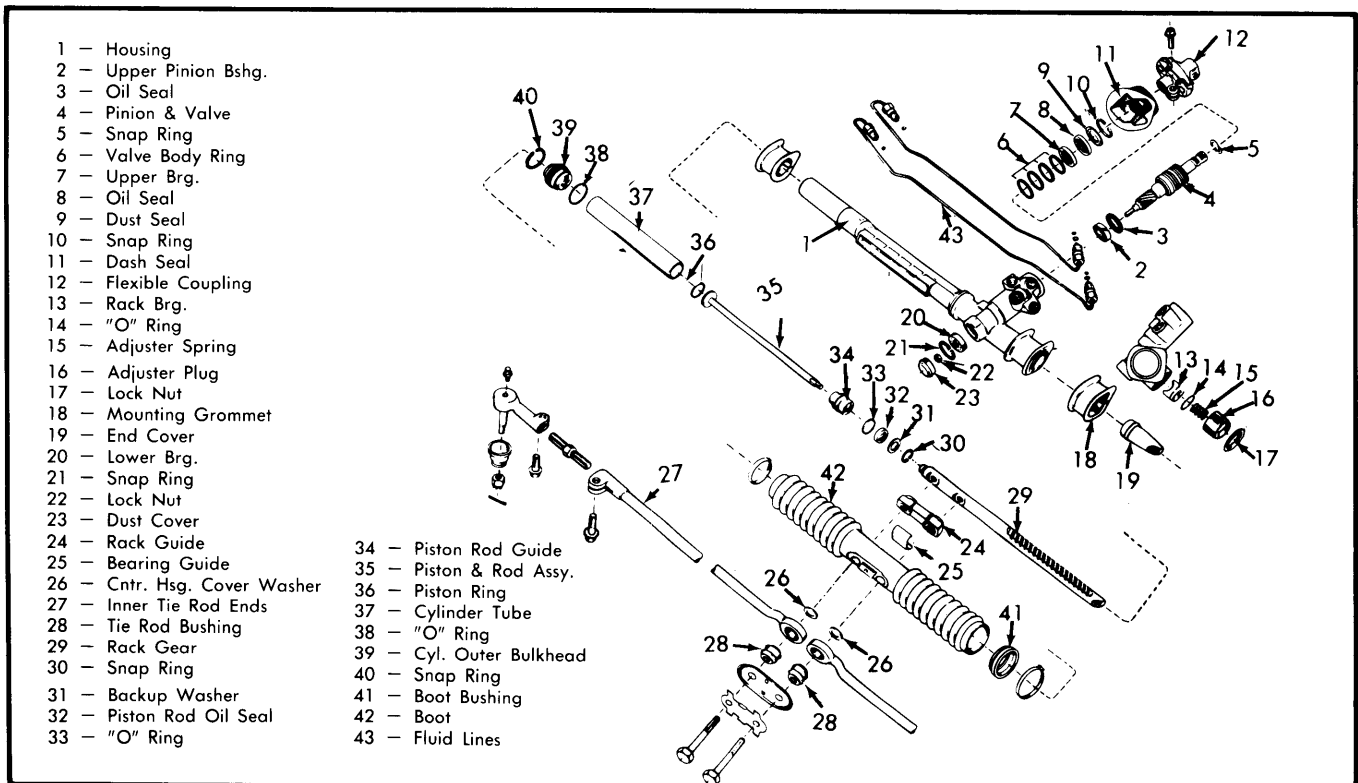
Exploded View of "J" Body Power Rack & Pinion Steering Gear
